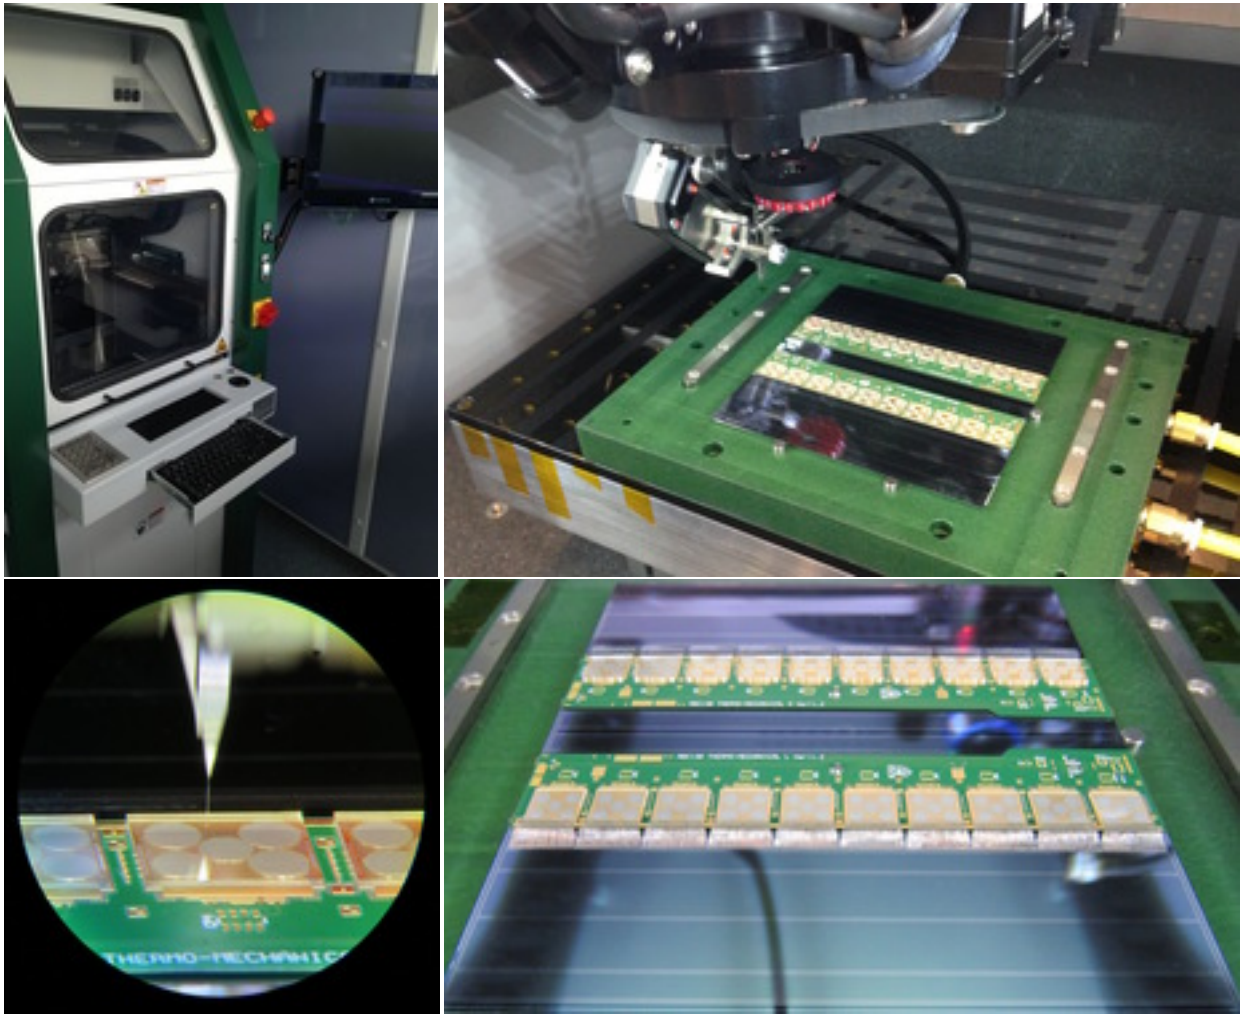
Photographs of the wire bonding machine. These feature the wire bonder machine itself (top-left), the needle inside the wire bonder with module underneath (top-right), a close-up of the needle wire bonding a patterned glass ABC to the sensor (bottom-left), and a fully wire bonded module (bottom-right).
